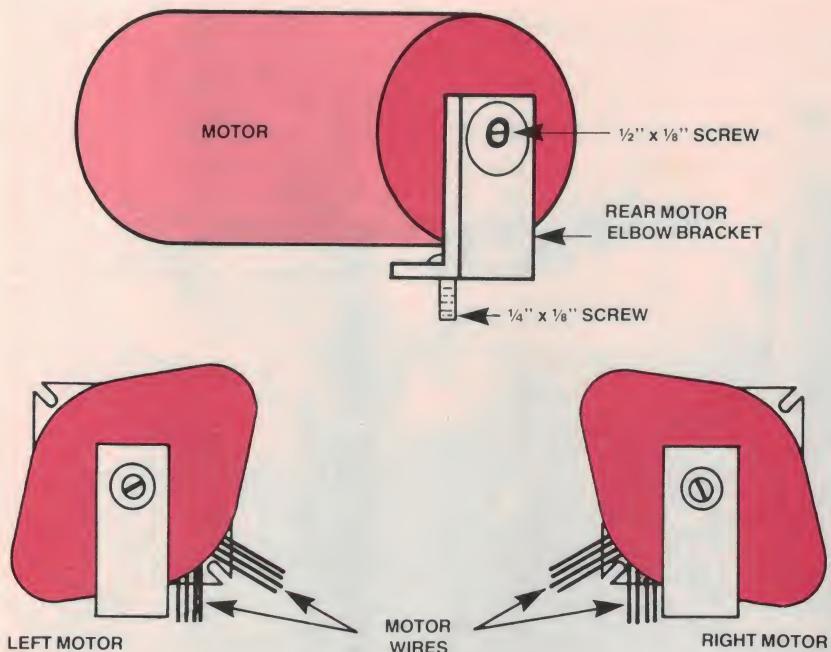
How the rear motor mount bracket is fixed to each motor. Note the different positions for the left and right motors.
